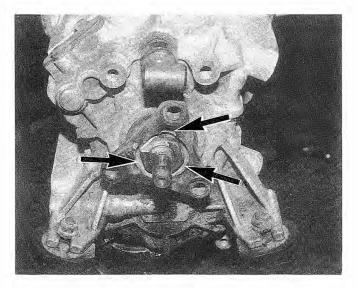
Lockplate tabs (arrows). Bend tabs out of groove to remove lockplate and collar nut.
